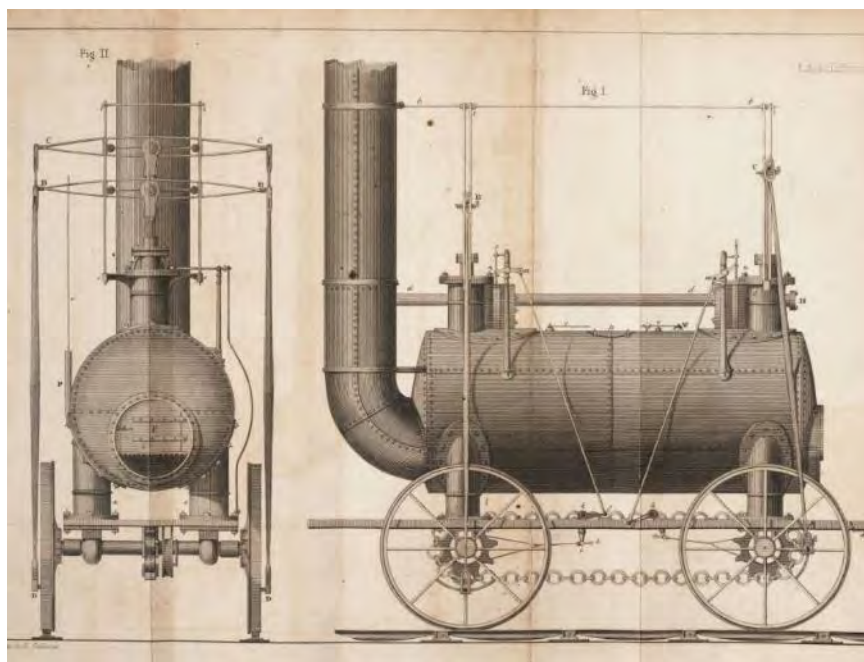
Slip eccentric valve gear on a Killingworth locomotive in the 1820s.
